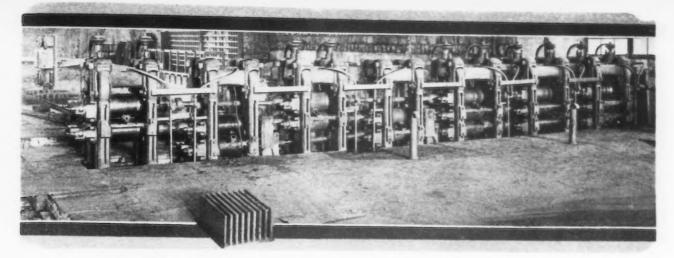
Three-High 10-In. Rolling Mill with SKF Roller Bearings
